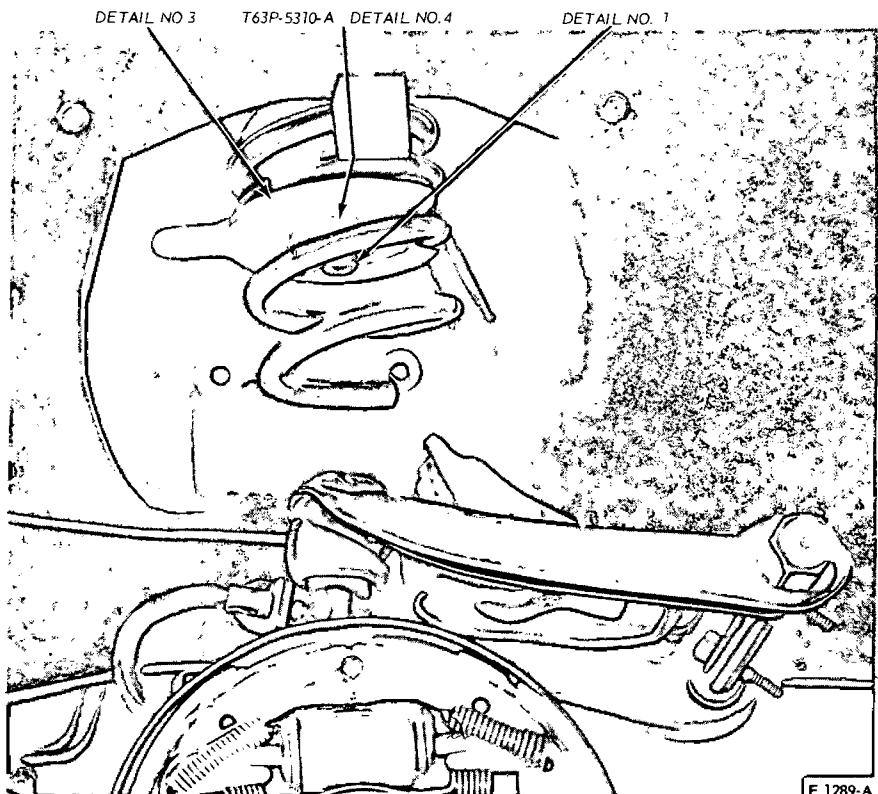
Compressing Spring—Lower View —Comet, Falcon, and Fairlane
